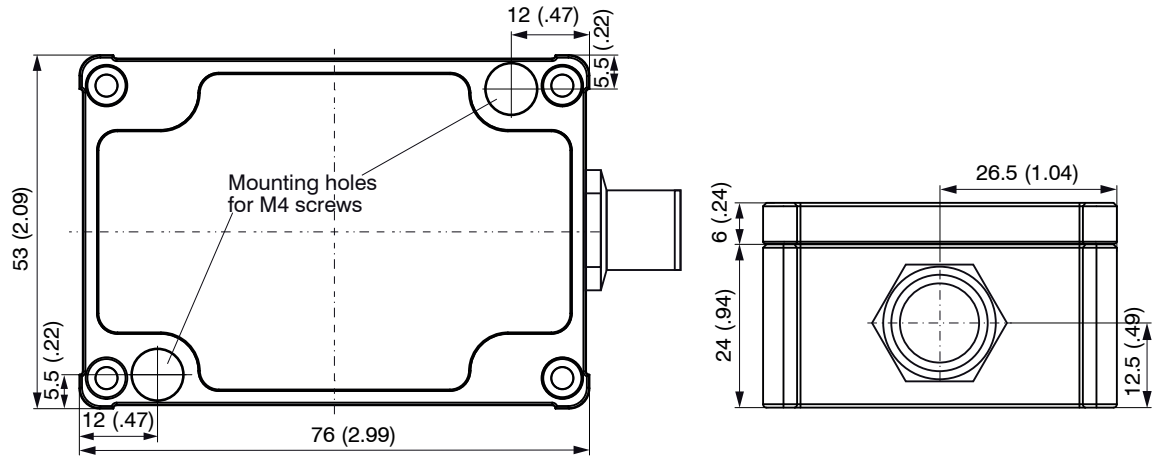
Dimensional drawing, dimensions in mm (inches), not to scale
